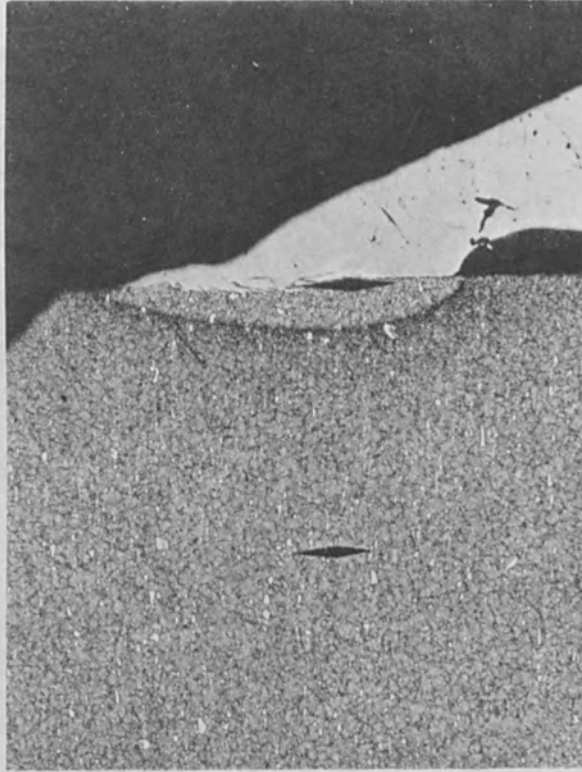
Is a photomicrograph of the retainer ring to bearing weld. It can be seen that extent of heat affected zone is extremely small.
